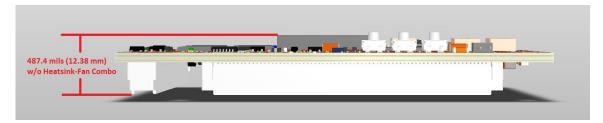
UltraZed-EG SOM Side View Mechanical Dimensions
